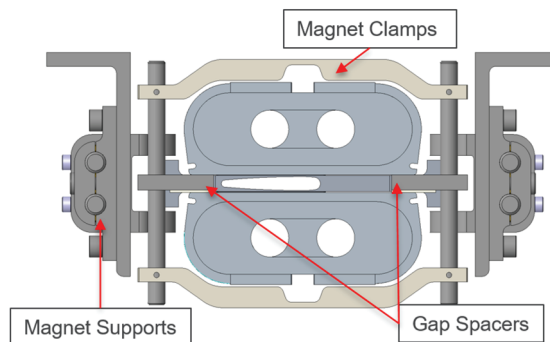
New single piece magnet design and corresponding components being reused inside of the SCU cryostat.
